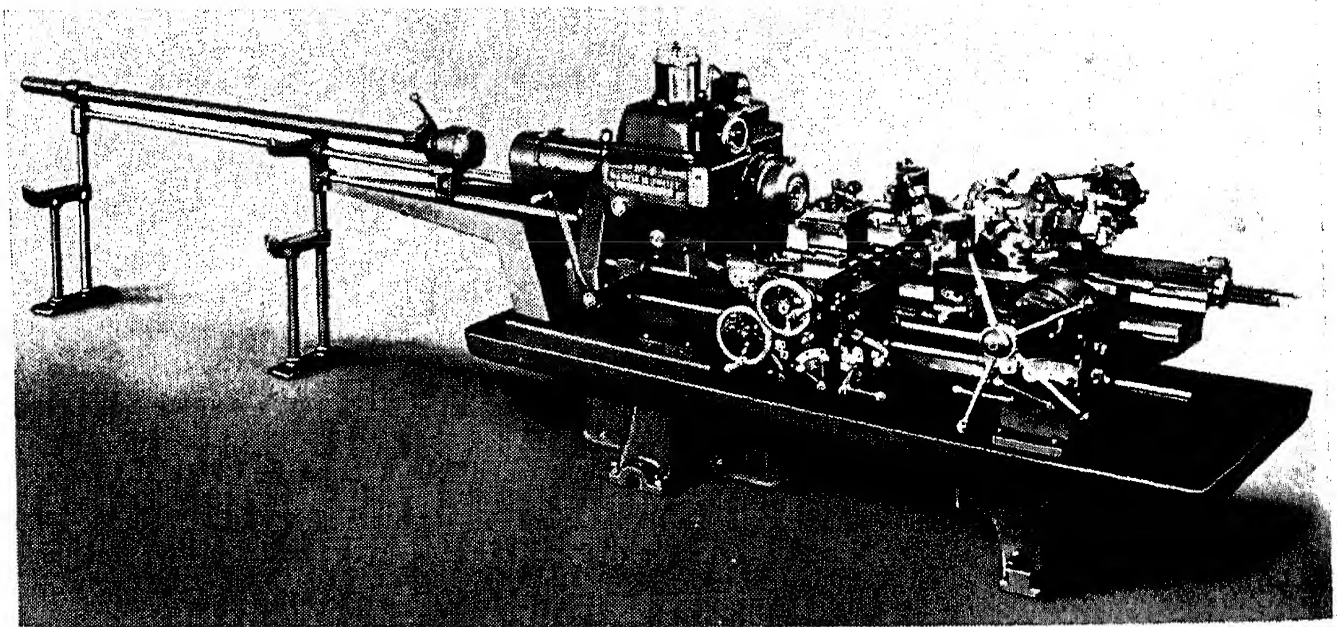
A ram-type turret lathe set up for bar work. (Courtesy The Warner and Swasey Co.)
